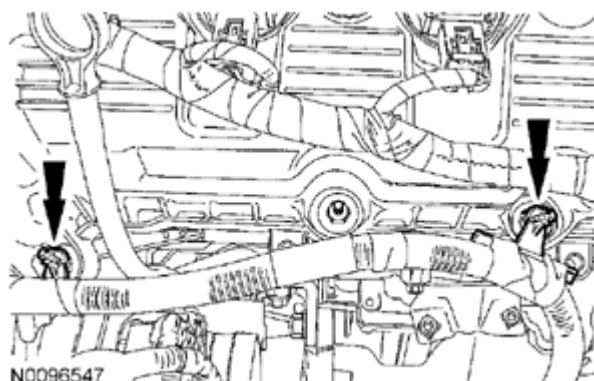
Locating B+ Wiring Harness Retainers Of Valve Cover Stud Bolts
